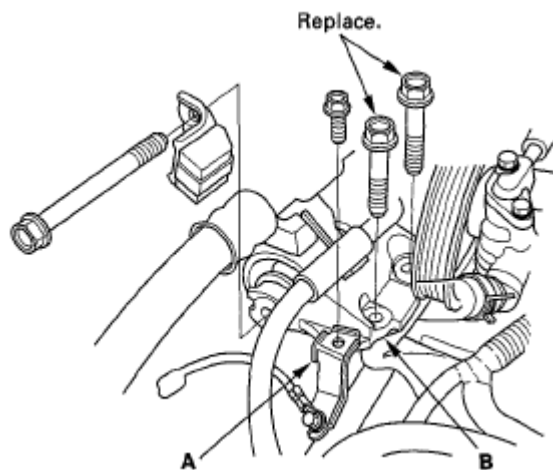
Identifying Side Engine Mount Bracket And Ground Cable
